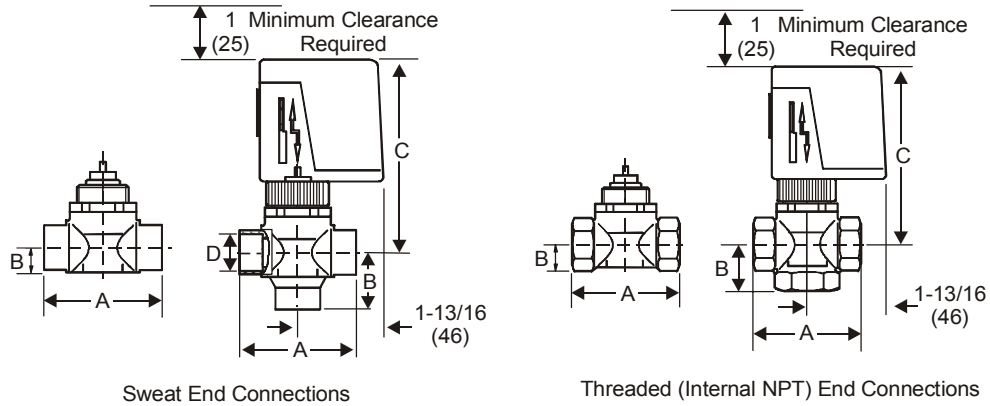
VA-7010 Actuated VG4000 Series Valve Dimensions, in. (mm)
